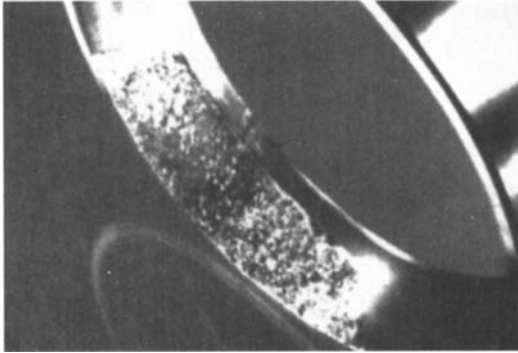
Bearing race damage by spalling. (Courtesy of Caterpillar Inc., Peoria, IL.)
